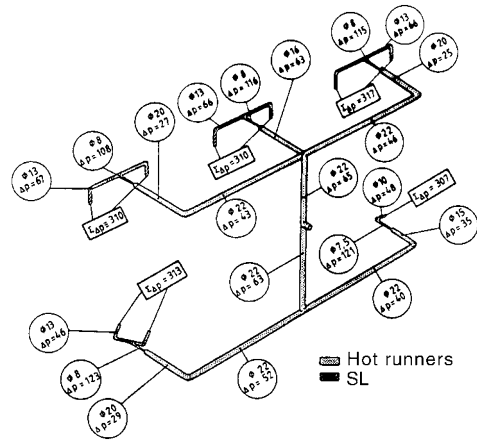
Balanced gating system (diameters in mm, pressures in bar)
